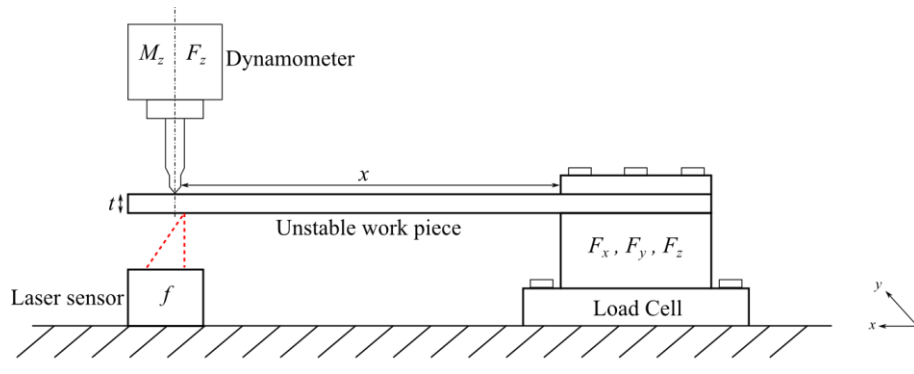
Experimental setup for the machining of unstable CFRP- work pieces
